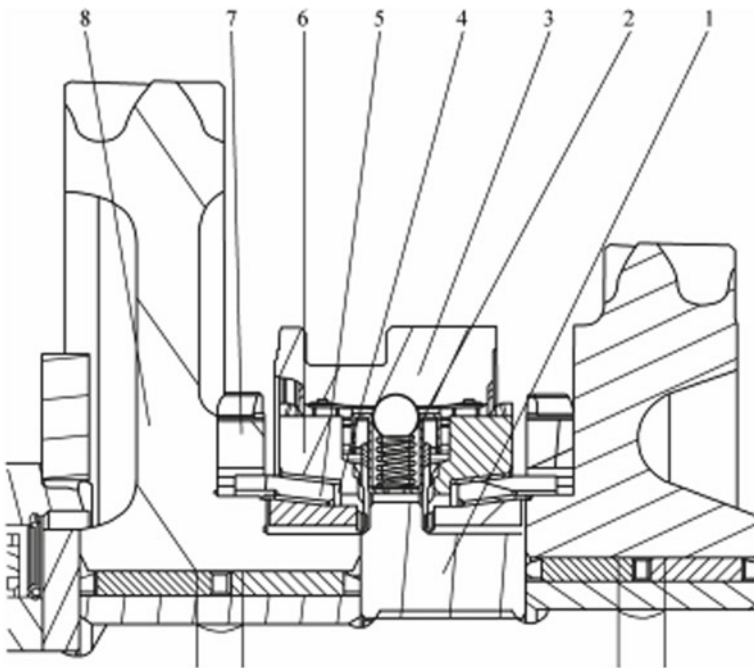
Double-cone lock ring type inertial synchronizer. 1—Synchronizer hub, 2—slider, 3—gear sleeve, 4—inner ring of synchronous ring, 5—middle ring of synchronous ring, 6—outer ring of synchronous ring, 7—soldered tooth ring, 8—gear
